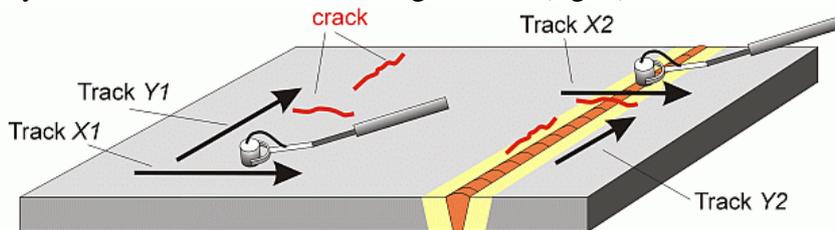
Two-dimensional scanning of test object (left standard sheet, right welded sheets)
